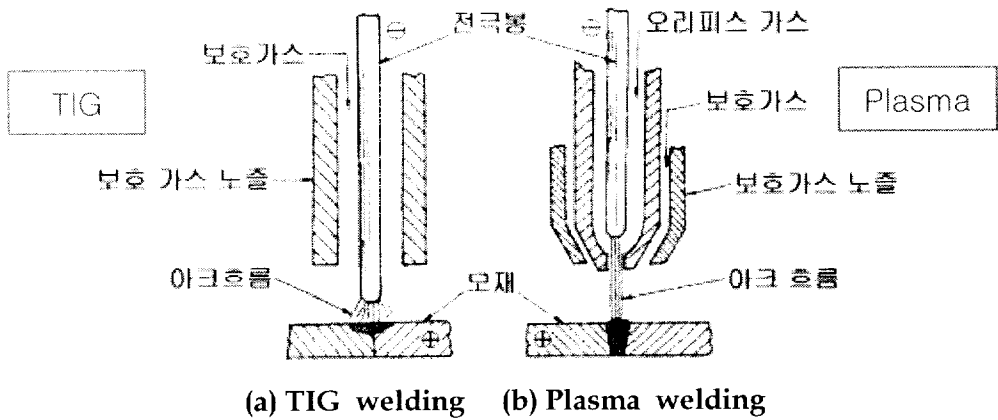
Schematic of TIG welding and Plasma welding
